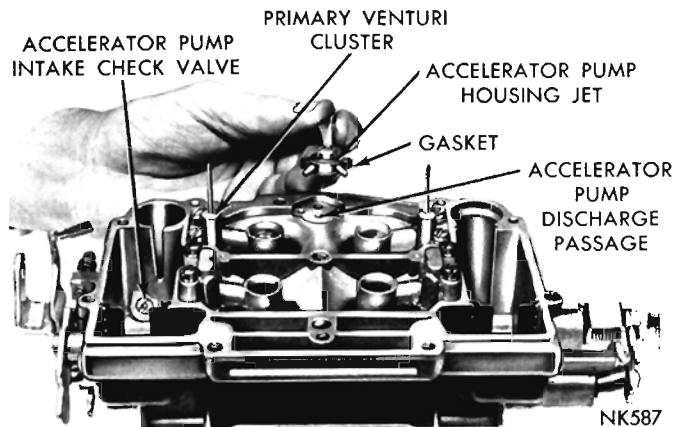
Removing or Installing Accelerator Pump Jet Housing
